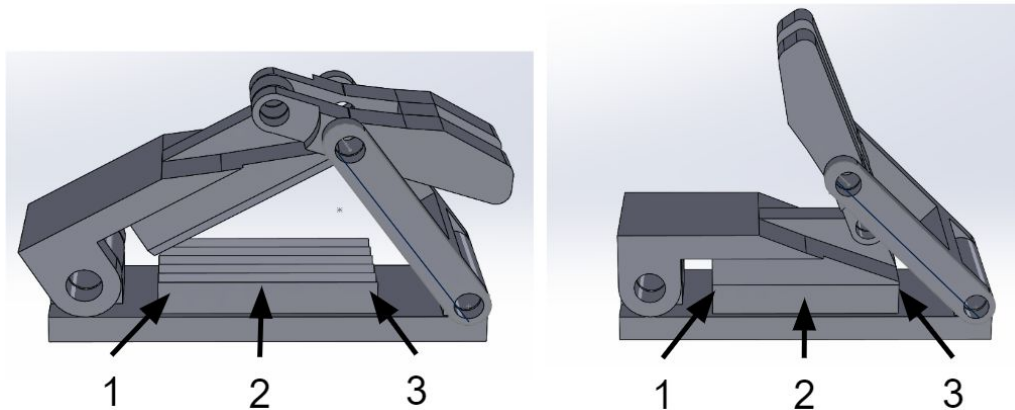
SolidWorks drawing of standalone clamp shown in the open (left) and closed (right) positions. Locations 1, 2, and 3 represent sites of string placement used for distribution testing.
